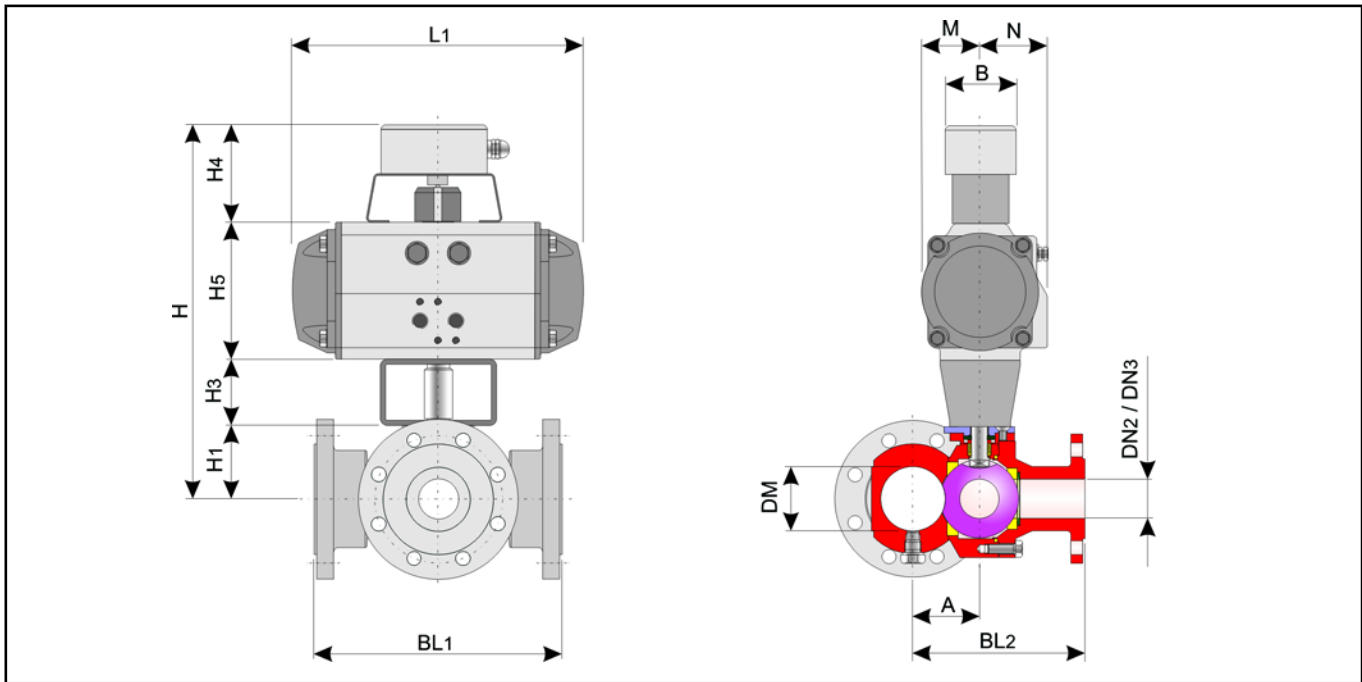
Dimensional drawing, Metering valve with AT-quarter-turn actuator Series 31a
